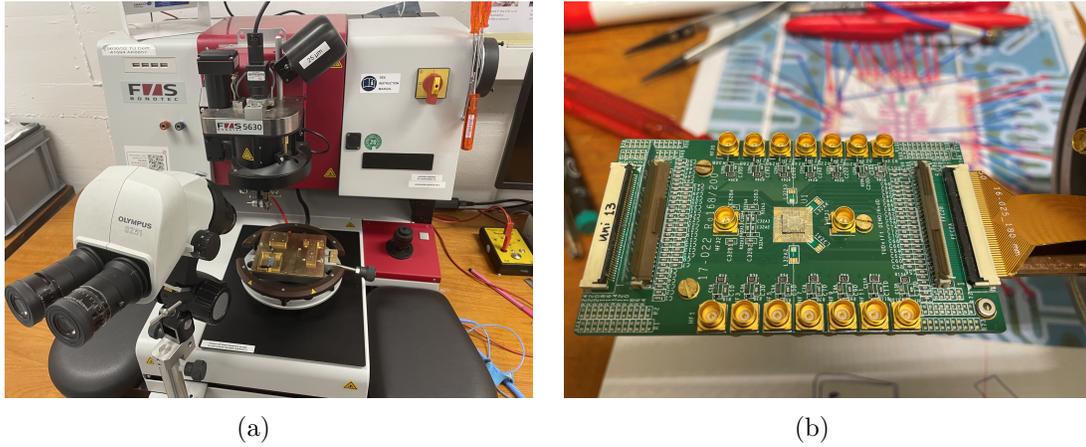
Pictures for (a) BONDTEC 5630 Semi-Automated wedge bonder (b) A bonded sample on PCB connected to the stripline.
